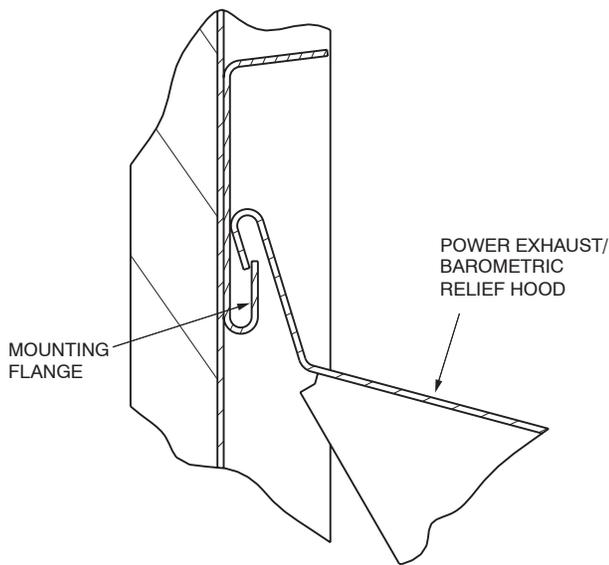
Barometric Relief/Power Exhaust Hood Flange
